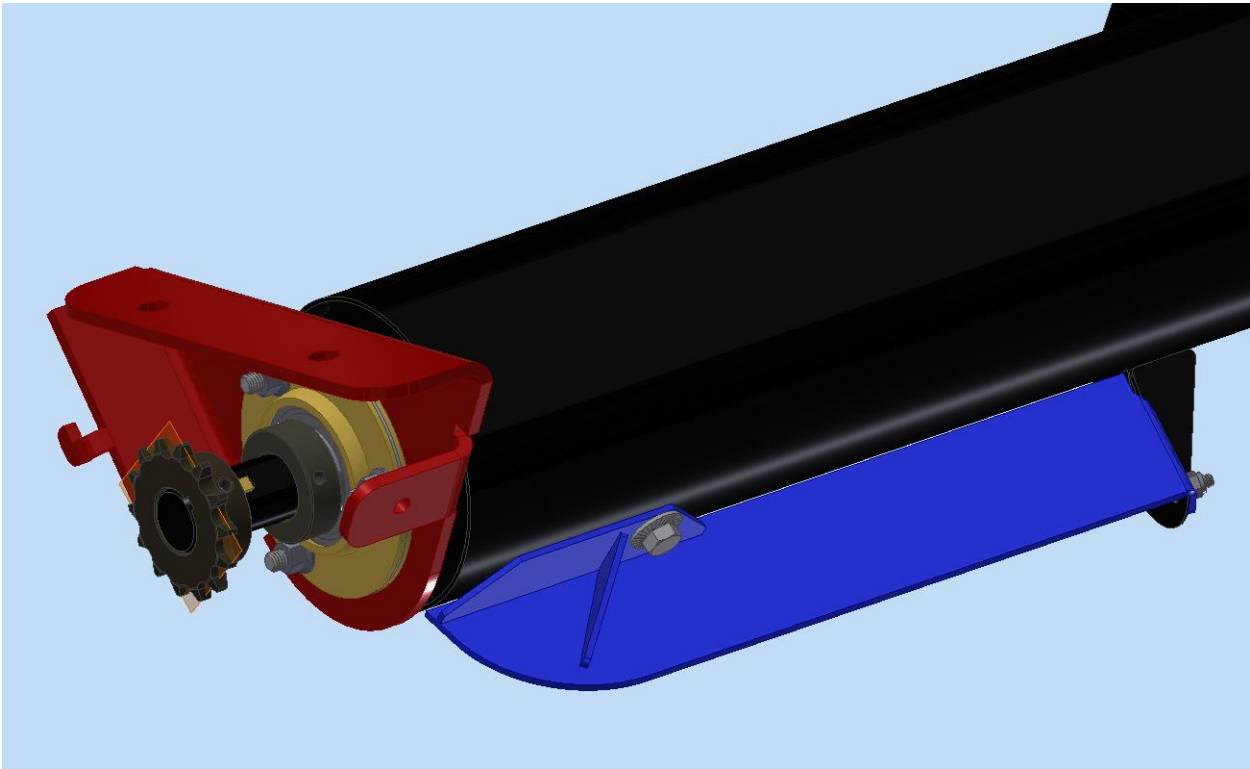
LH AUGER CENTER BEARING, SPROCKET AND PADDLE
